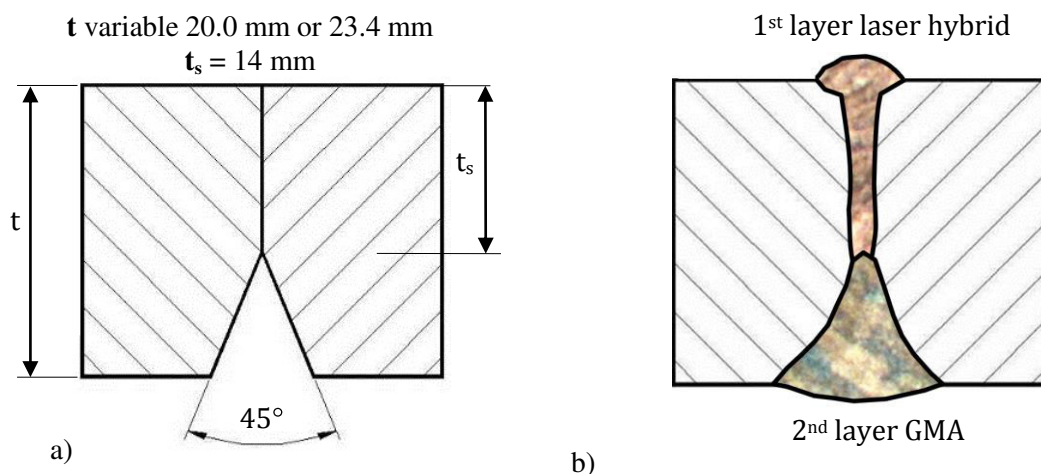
Edge preparation (a) and welding sequence (b)
